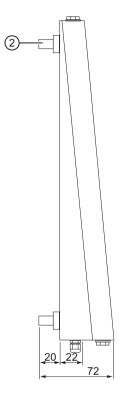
Dimension drawing of the mounting bracket on the stainless steel housing (outdoor crane)
